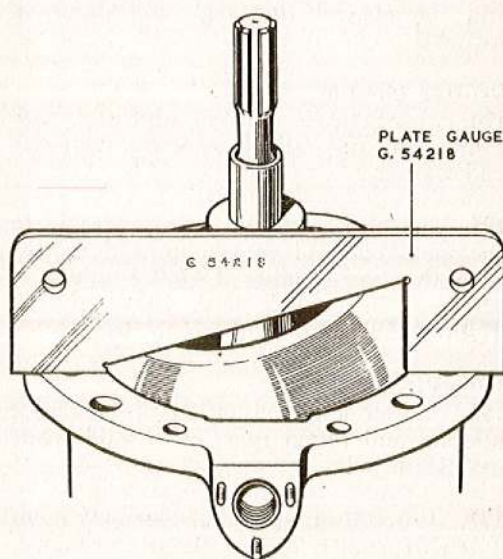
Setting camplate inclination and control ring, using gauge G.54218
